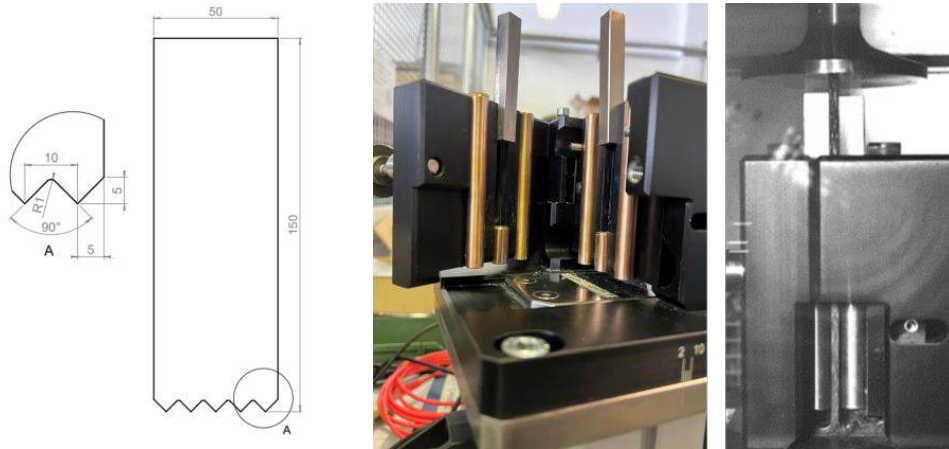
Flat shape: a) geometric scheme, and b) anti-buckling testing fixture.
